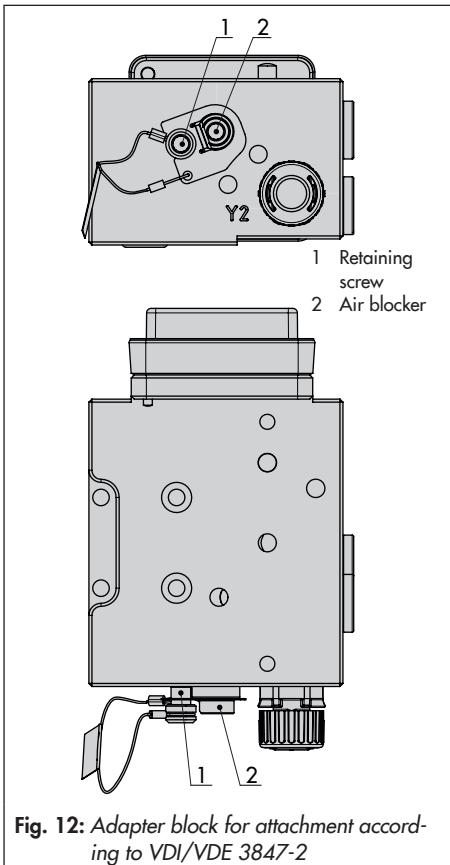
Adapter block for attachment according to VDI/VDE 3847-2
